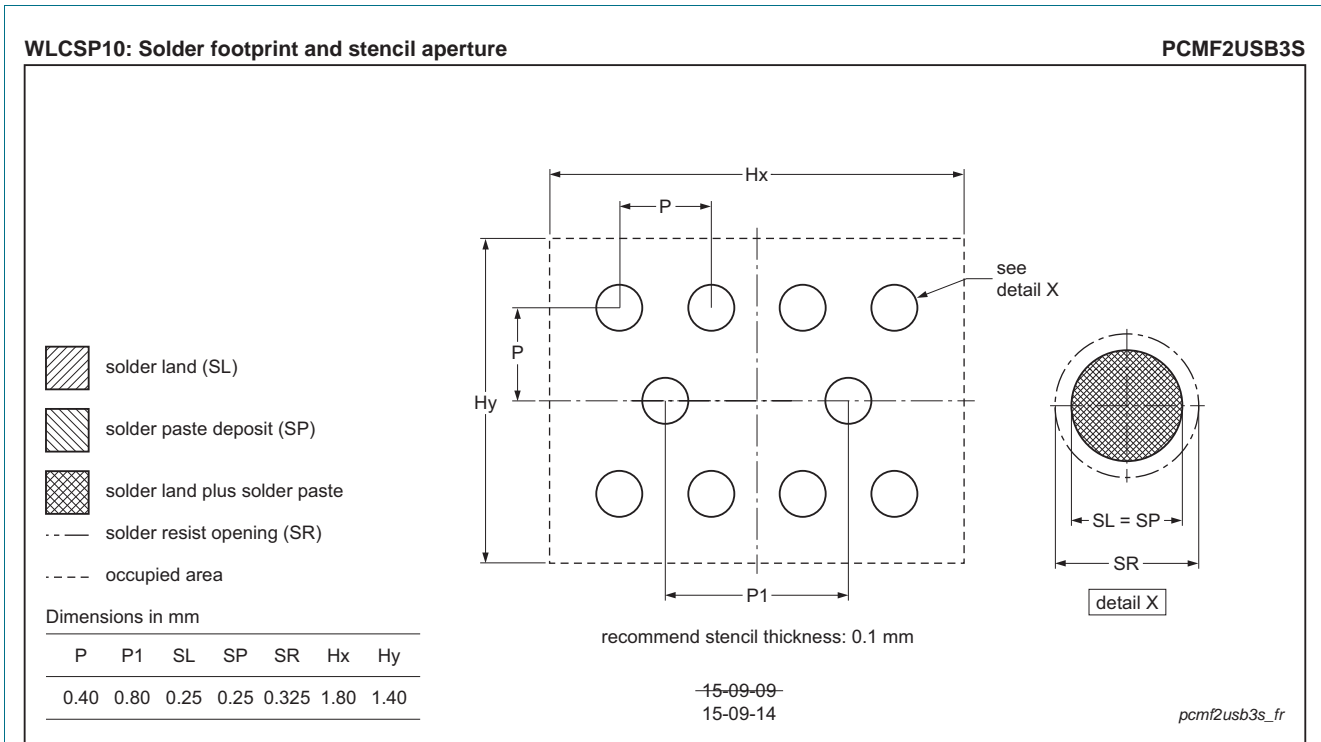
Soldering footprint WLCSP10 (PCMF2USB3S)
